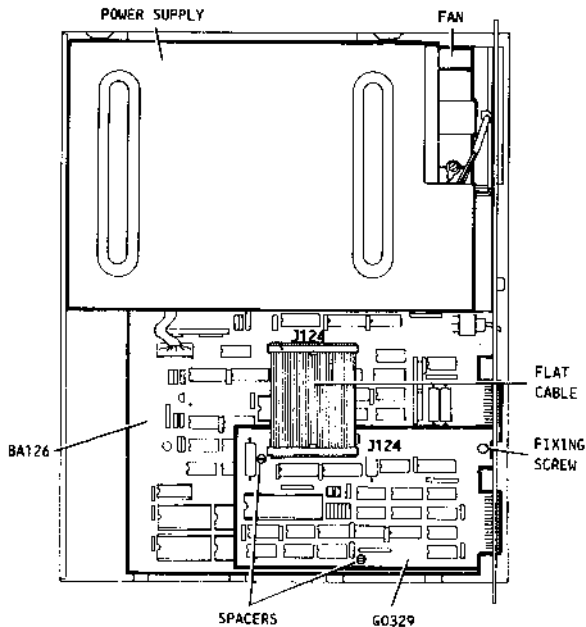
Assembly of Pin Pad and Badge Reader Option Board
